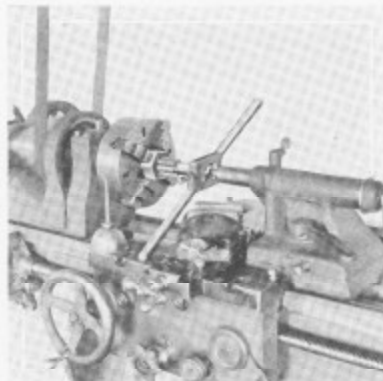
Tapping a Large Nut Held in the Lathe Chuck. Tap is guided by Tailstock Center
